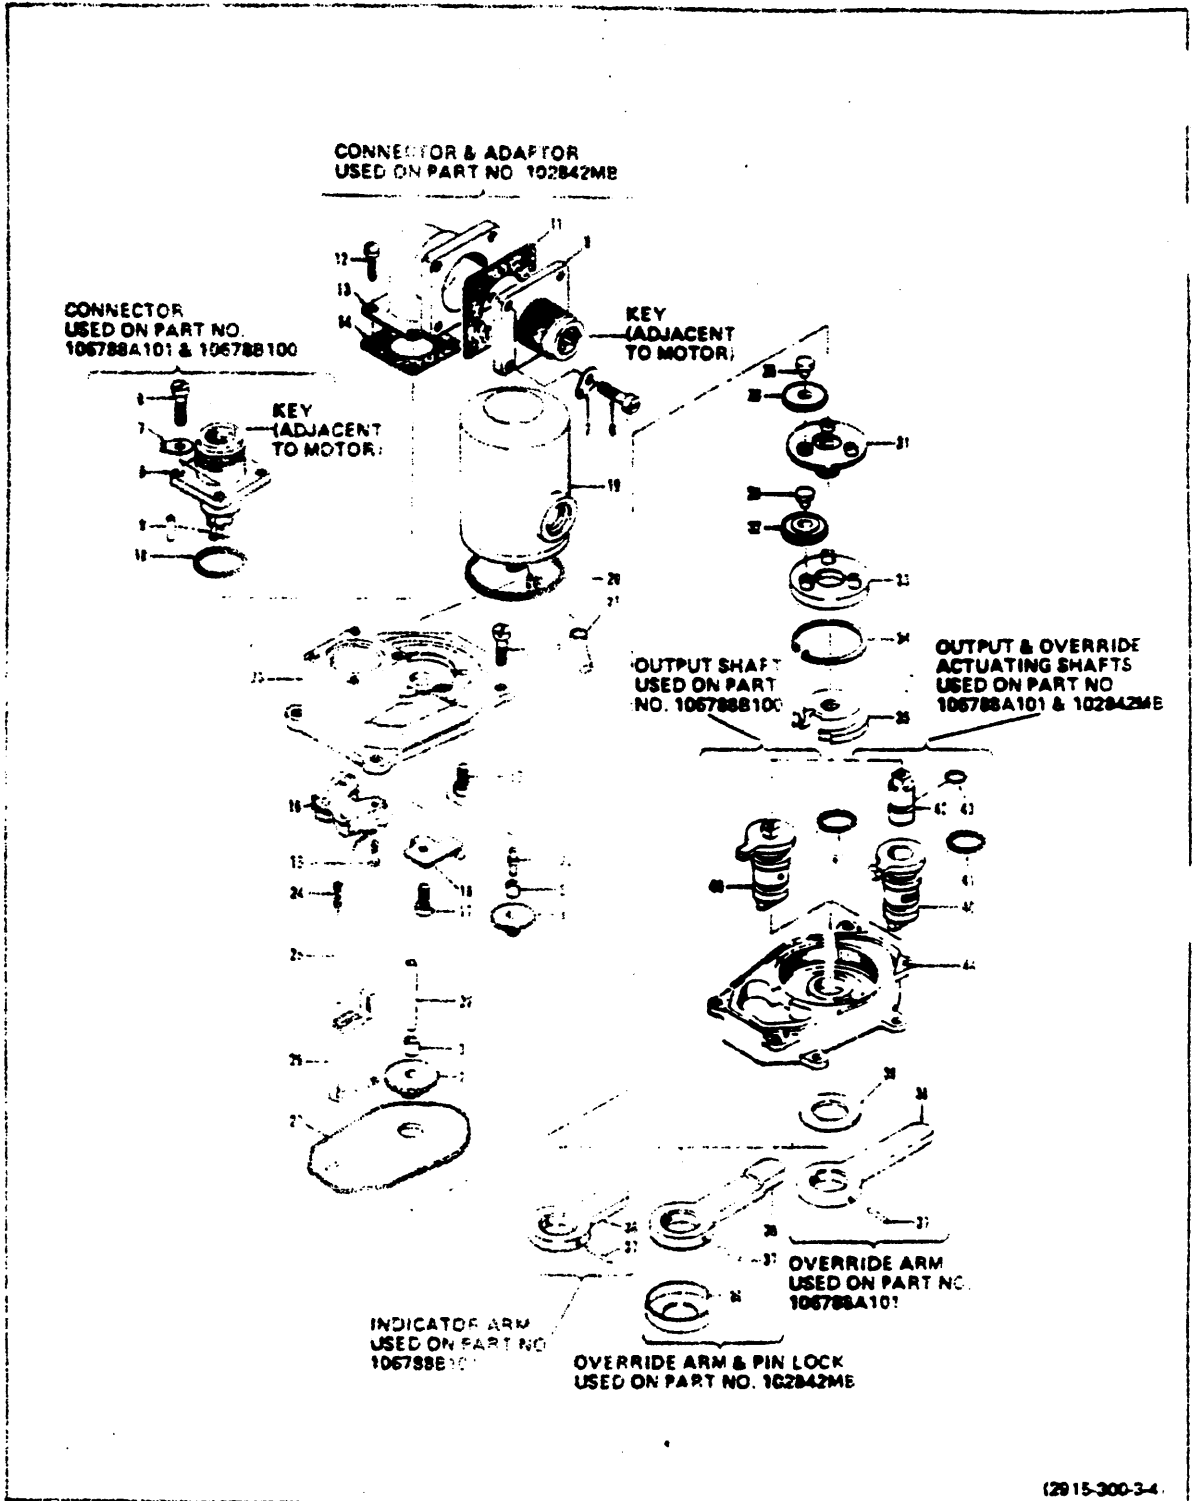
Actuator Assembly, Part No. 106788A101, 106788B100, and 102842MB - Exploded View
